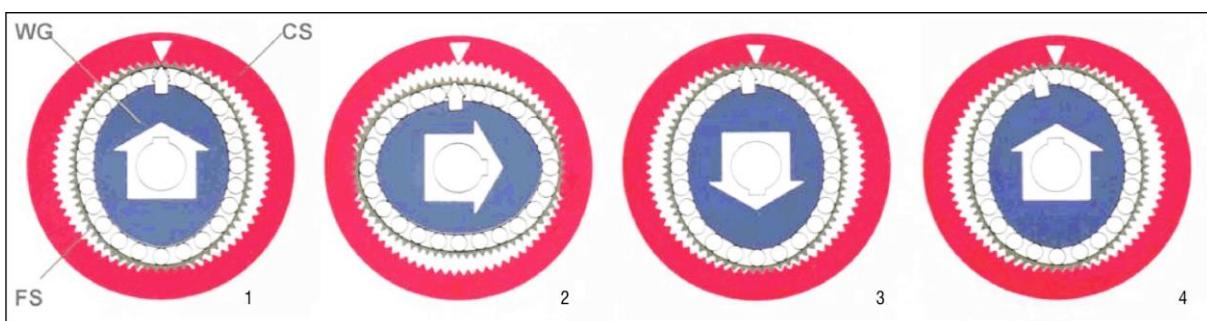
Operating principle of the Harmonic Drive®-gearing
